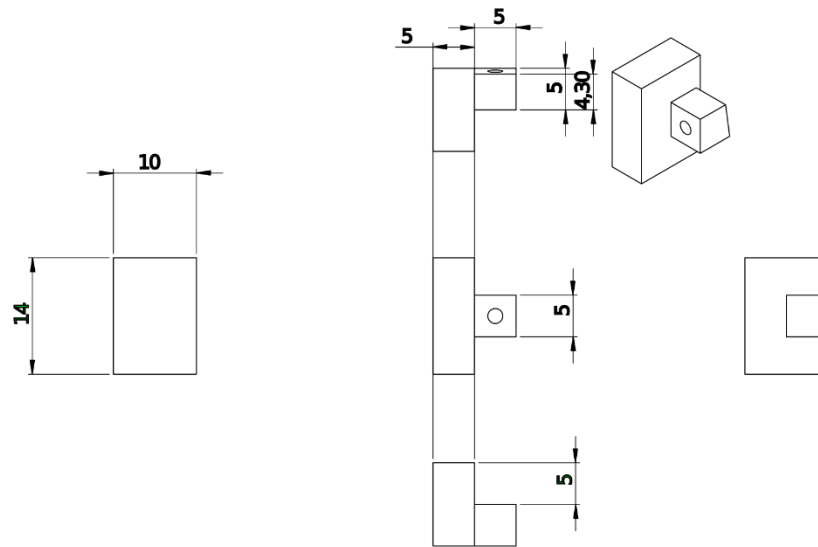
Construction drawing for the fibre-mounted assembly. The figure shows a ferrule holder, which is, in principle a $5 \times 5 \times 5 \text{ mm}^3$ cube, but one side is at 98° with the bottom surface. This is meant to reduce back reflections. The centre hole in the ferrule holder has a 1.8mm diameter to hold fitting a fused-silica ferrule for an optical fibre. The ferrule holder is then adhesively bonded to the $10 \times 14 \text{ mm}^2$ surface of a spacer with the dimensions $10 \times 14 \times 5 \text{ mm}^3$.
